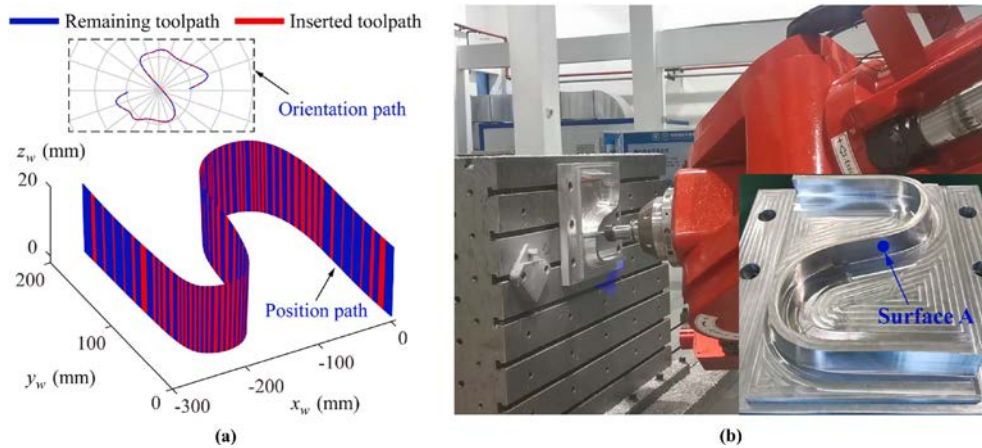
Real machining of a s-shaped tool path using corner smoothing in robotic machining⁸⁵. (a) The test s-shaped tool path after corner smoothing using the method in Ref. 85; (b) Real machining testing of the s-shaped tool path and its machined surface.
